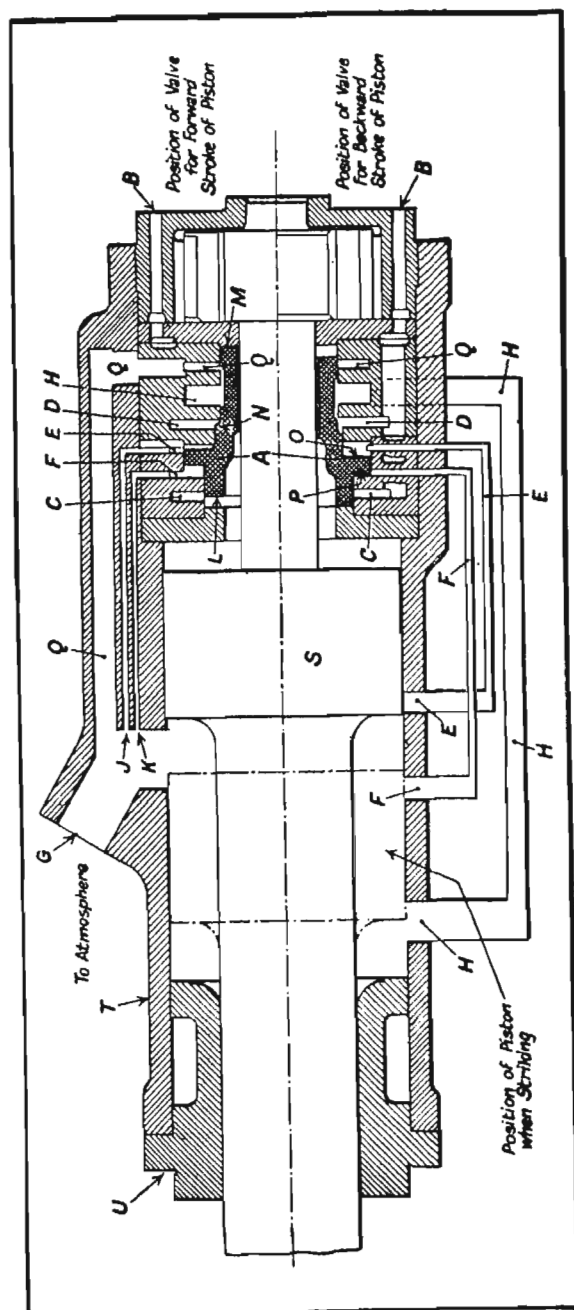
Spool Valve Mechanism of Pneumatic Drill.
